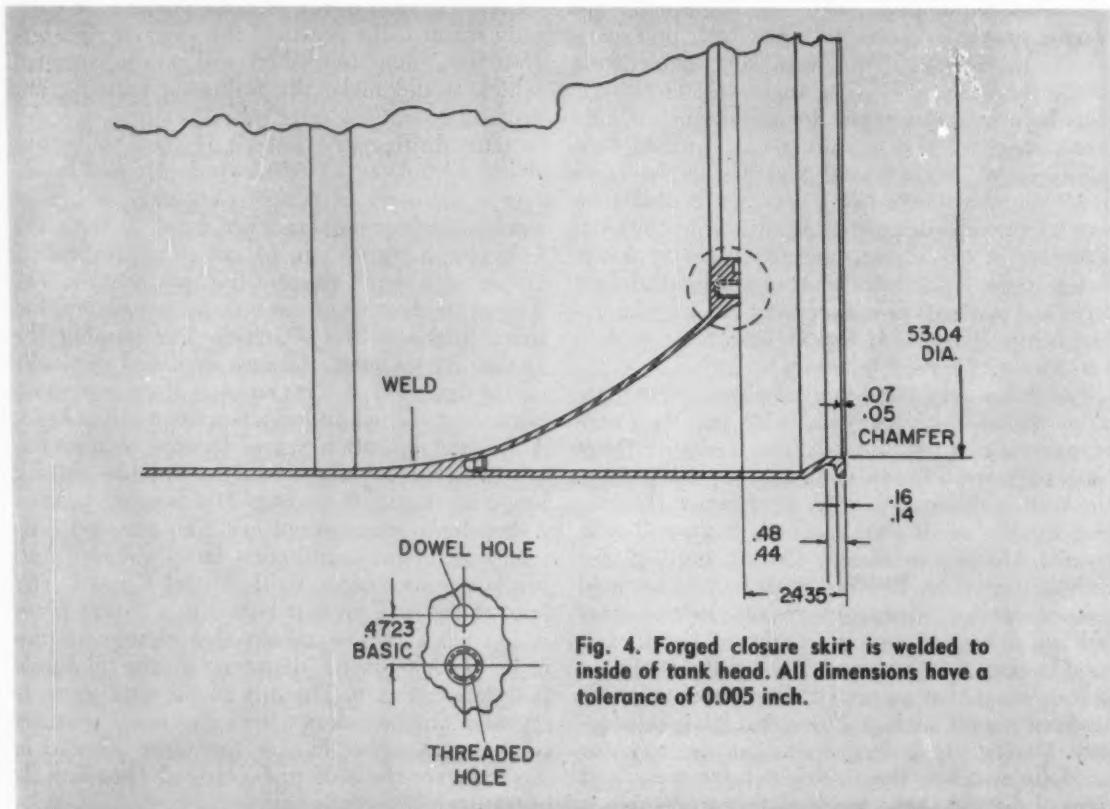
Forged closure skirt is welded to inside of tank head. All dimensions have a tolerance of 0.005 inch.
